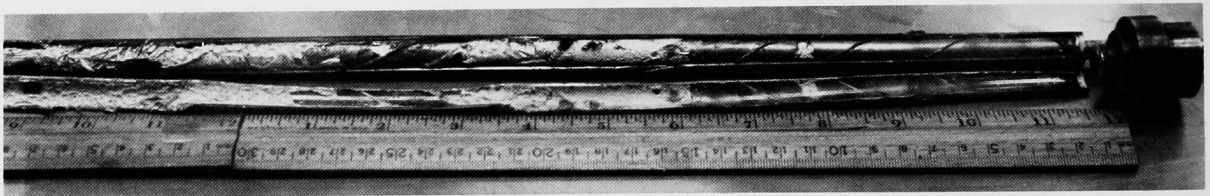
Exposed Portion of Middle Section of Inner Wall after Longitudinally Slitting Outer Wall. ANL Neg. No. 900-1157.
